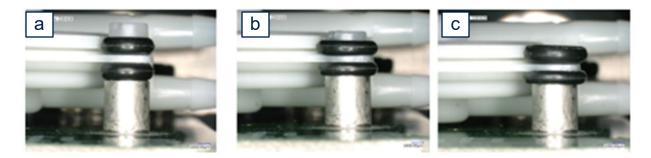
Images showing o-ring appearance as the nylon bolt is tightened. O-rings should be well compressed as shown in (b). Under tightening (a) or over tightening (c) may lead to audible noise.
